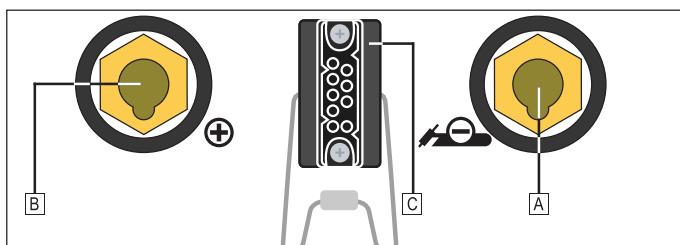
Design with central welding torch connection F: Connection points on front of machine
